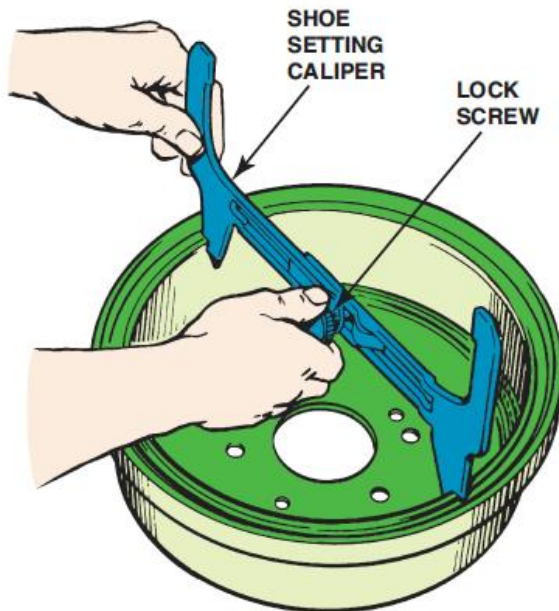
Using a brake shoe clearance gauge, first adjust it to the drum inside diameter and tighten the lock screw.
